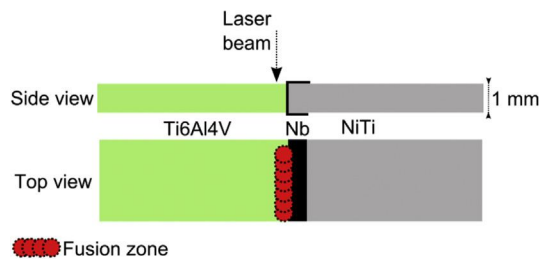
Schematic of a weld setup for dissimilar laser beam welding of Ti6Al4V to NiTi with a Nb interlayer [118]
